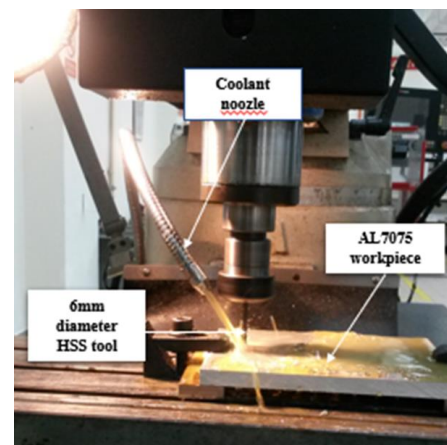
Experimental set up for drilling Al 7075 in dry and CCF cutting condition.
